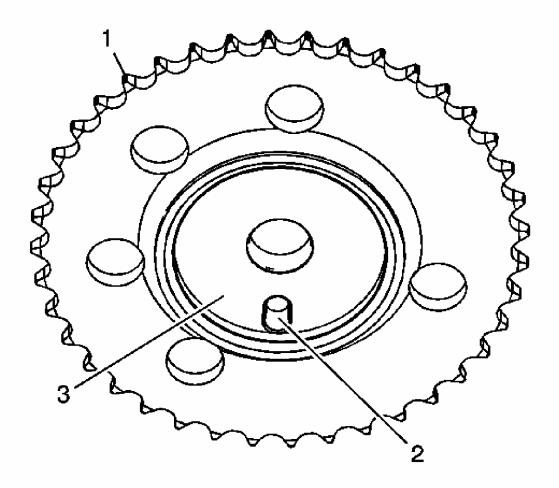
View Of Inspection Areas Of Back Of Right Intake Camshaft Sprocket Courtesy of GENERAL MOTORS CORP.
